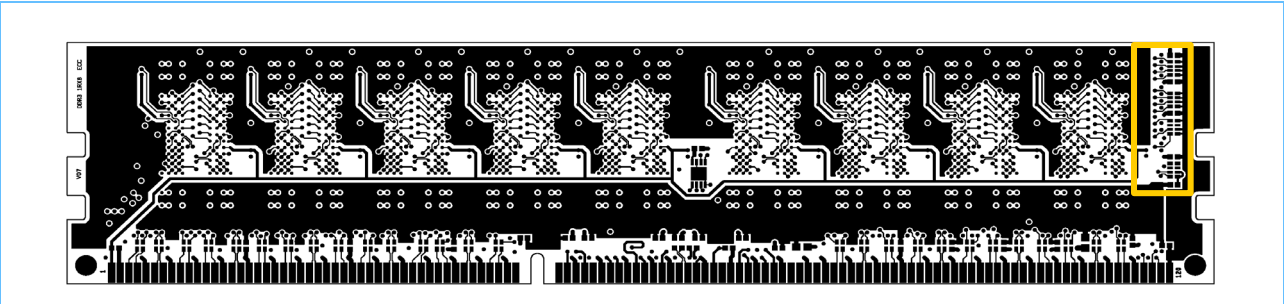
Test Point Identification (Raw Card Version D): Front Side, Full Board View
